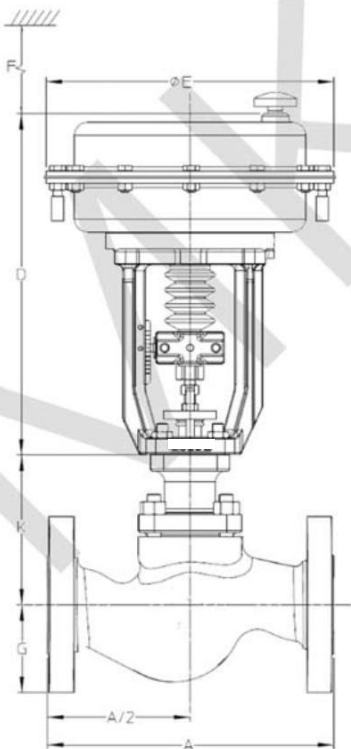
MK-GS Standard Valve Cover Dimension Drawing
